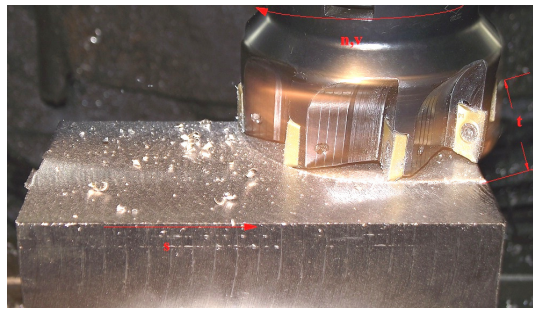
Processing by asymmetrical cut-up face milling with contact angle  $\Psi = 90^\circ$ .
